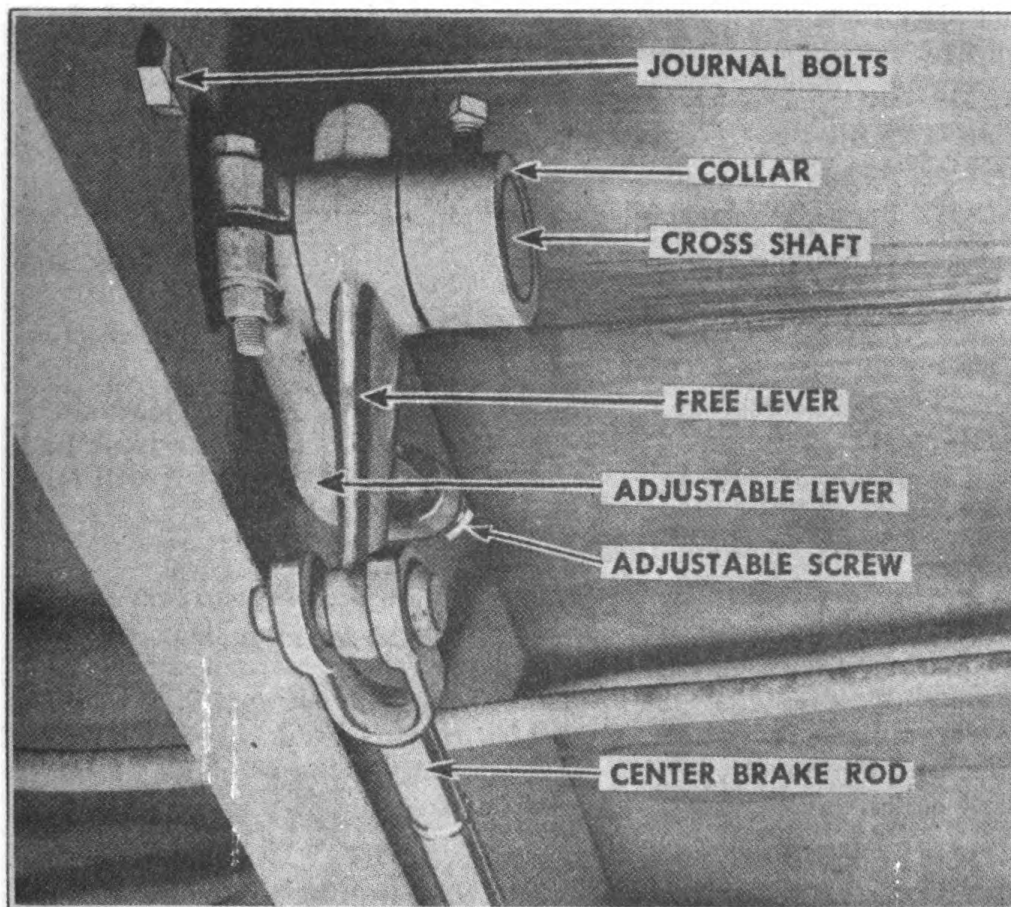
FRONT CROSS SHAFT AND ADJUSTABLE LEVER
